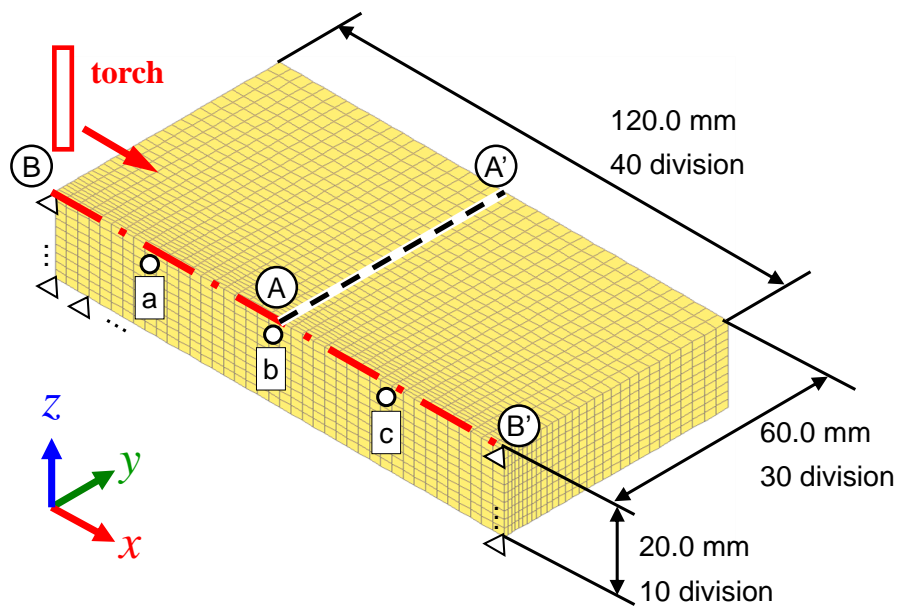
Analysis model of bead on plate welding.
